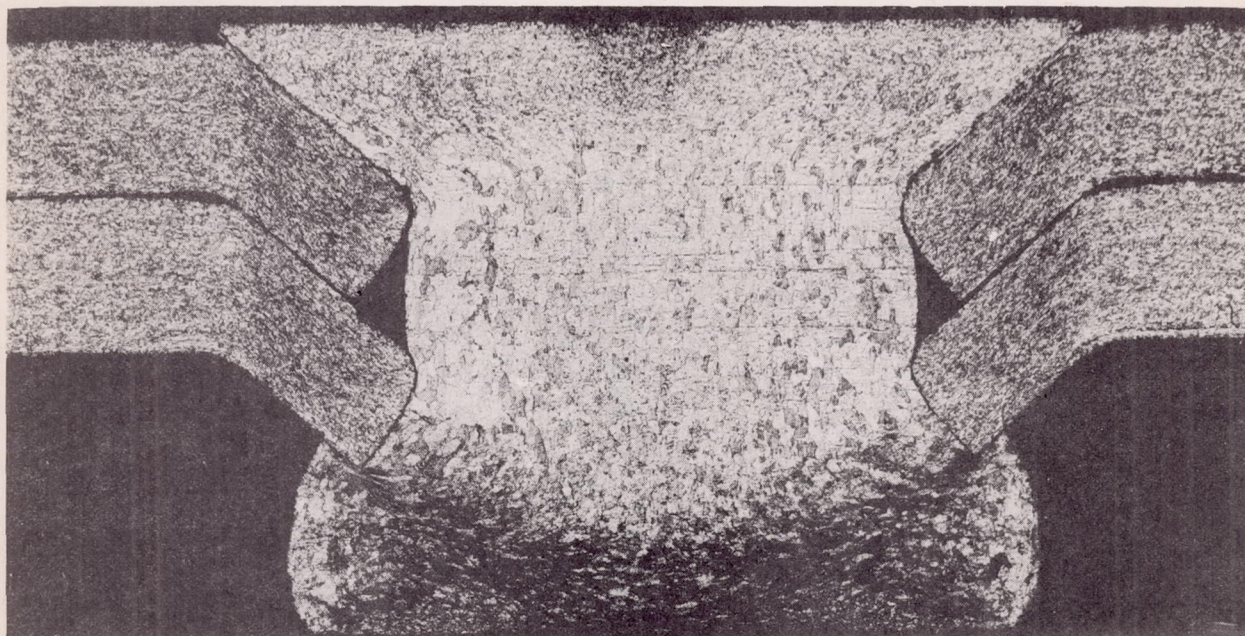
Set of dimples produced with 5000-pound pressure in 0.040-inch 24S-T sheet drilled with an 0.1285-inch diameter No. 30 drill. Magnified 20 times.
